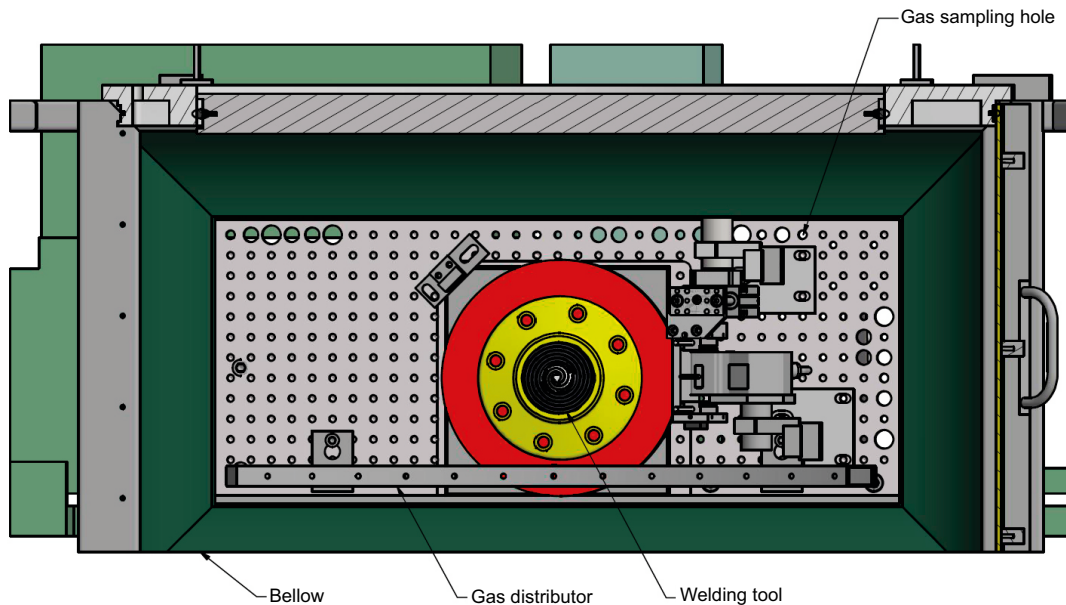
A front view of the welding head with a steel plate with threaded holes behind it. Different depth sensors and gas distributor 0 is mounted on the steel plate. The bellow allows motion in the plane of view as well as out of plane. The larger holes are used as feedthroughs for cables and gas lines.
